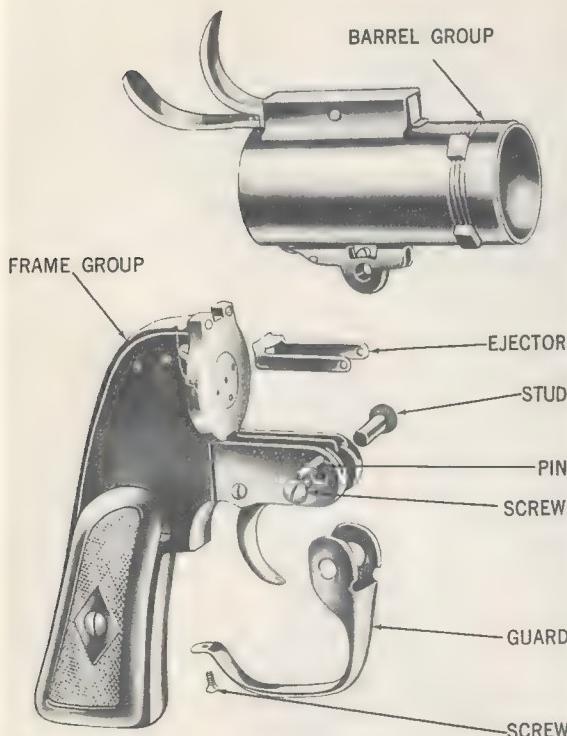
Pyrotechnic Pistol M8, Disassembled.
